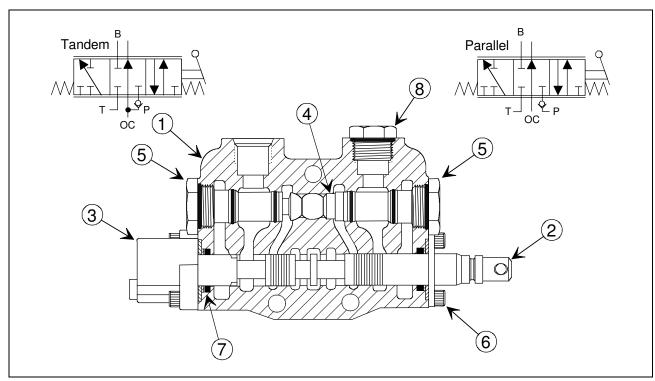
3-Way, 3-Position Parallel & Tandem Work Sections (Parallel Housing Shown Here)
